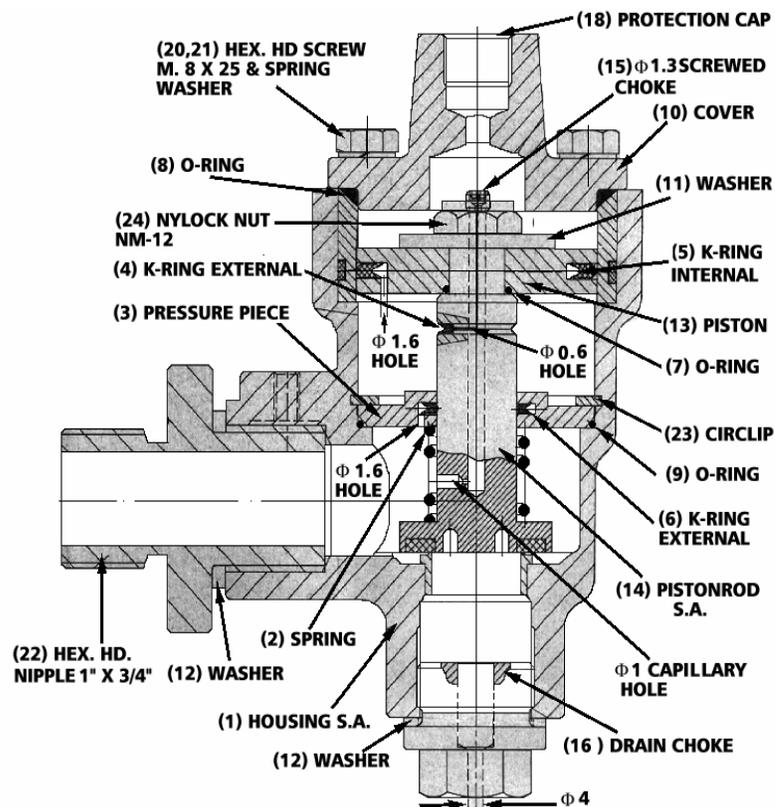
PASSENGER EMERGENCY ALARM VALVE ASSEMBLY
